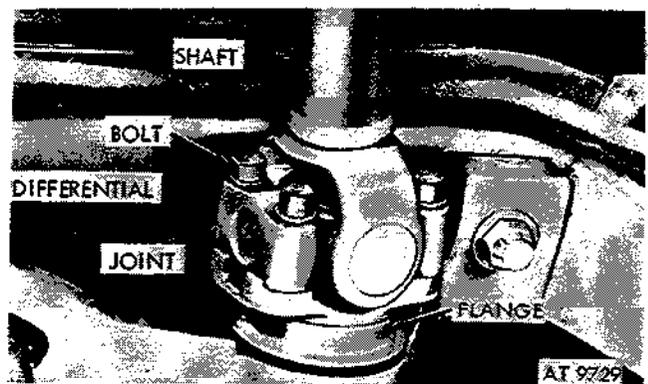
Remove front propeller shaft joint from front differential rear flange.
